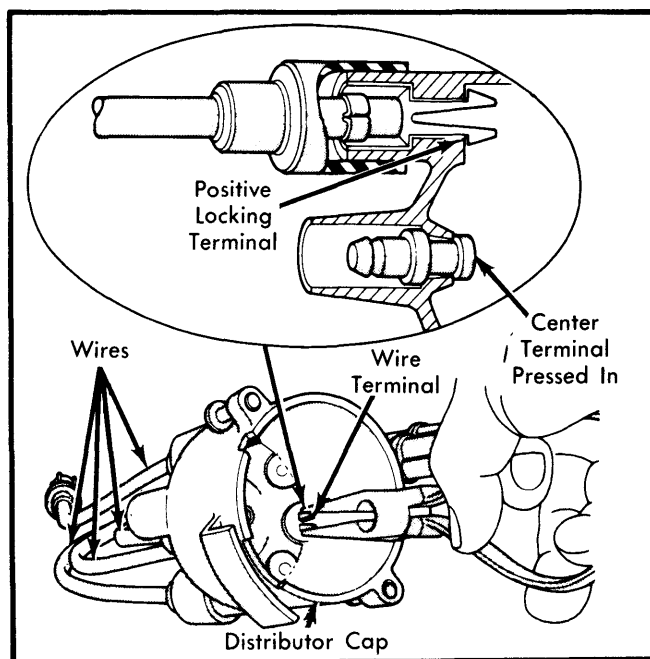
Use Pliers to Release Positive-Locking Spark Plug Wire Terminals
